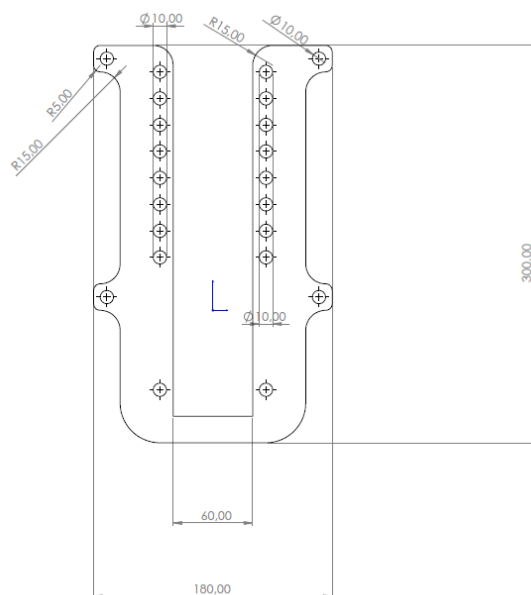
Technical drawing in mm's of the plate frame of the reservoir.
